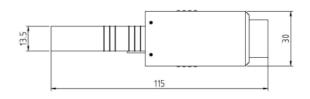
Dimensional drawing KLC1000/KLC2002 top view 1 Radial opening (with KLC1000 only)
